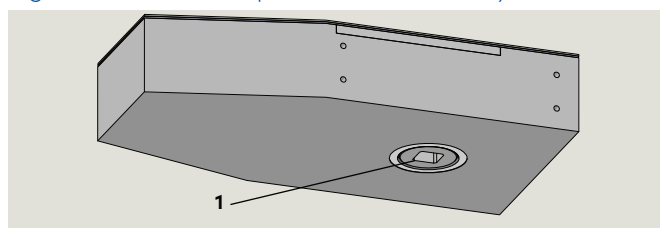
Surface mounted floor pivot assembly RS3423-010
